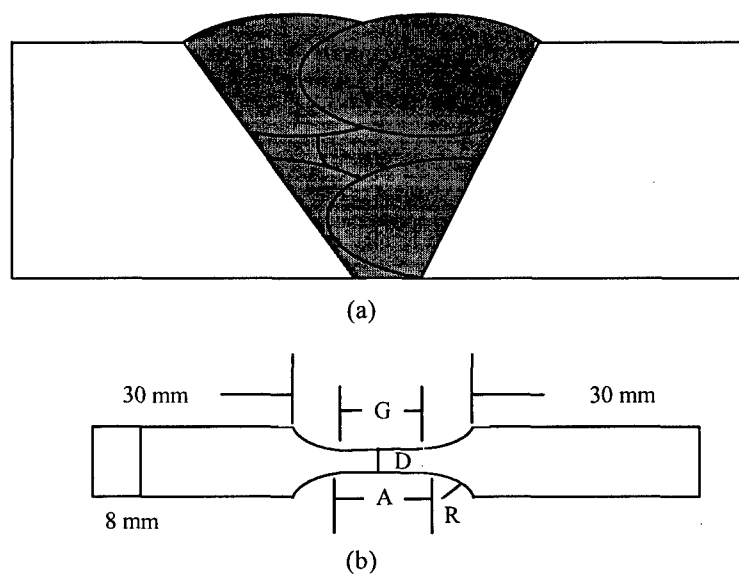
(a) Representative location of the extraction of tensile bar samples, and (b) “dimensions” of tensile bar specimens where the actual dimensions are shown in Table 15.
